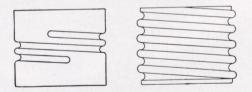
Tubular parts can be fitted inside one another and joined mechanically by means of threads rolled on each of the two members as shown. Engaging the threads then joins the parts. Axial position in relation to each other is adjustable, but they can be locked in place by upsetting both parts with a punch or by crimping to prevent rotation and disengagement.
